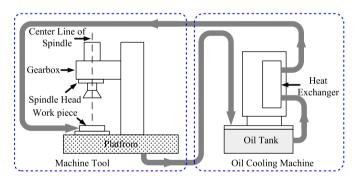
Relationship between an oil-cooling machine and a machine tool.
